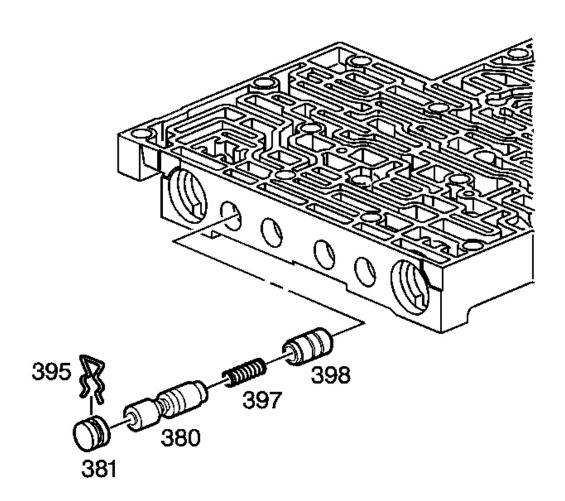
Identifying Isolator Valve & Regulator Apply Valve Courtesy of GENERAL MOTORS CORP.
